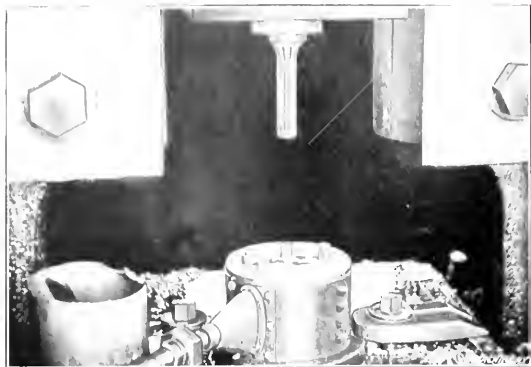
Gear-teeth Broaching Punch and Die in the Press
